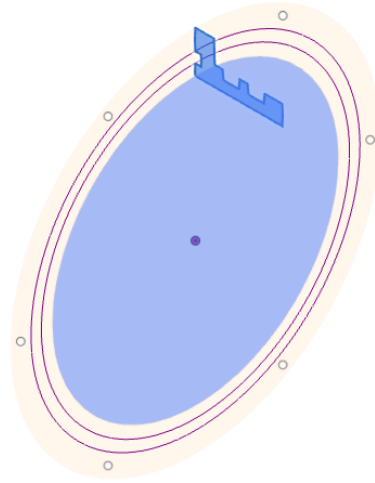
CAD DESIGN OF THE BACK COUPLING
